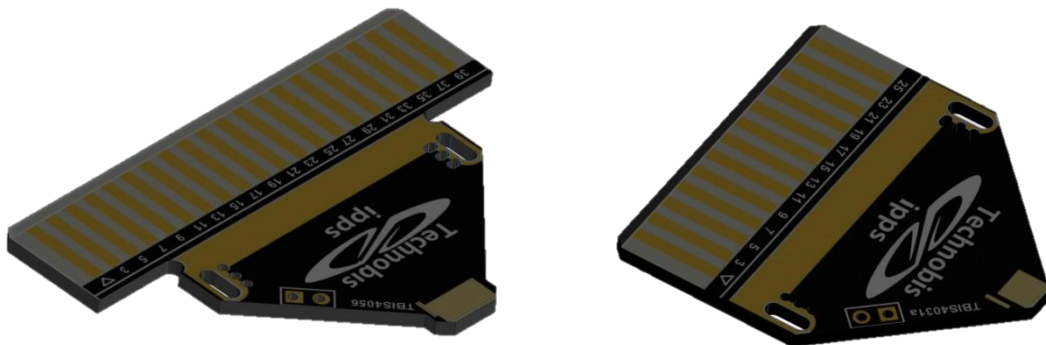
40-pin PCB (left) and 26-pin PCB (right)
